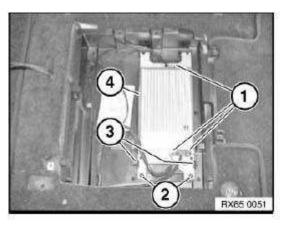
Plug Connection, Mounting Screws, Retaining Lug And Video Module
